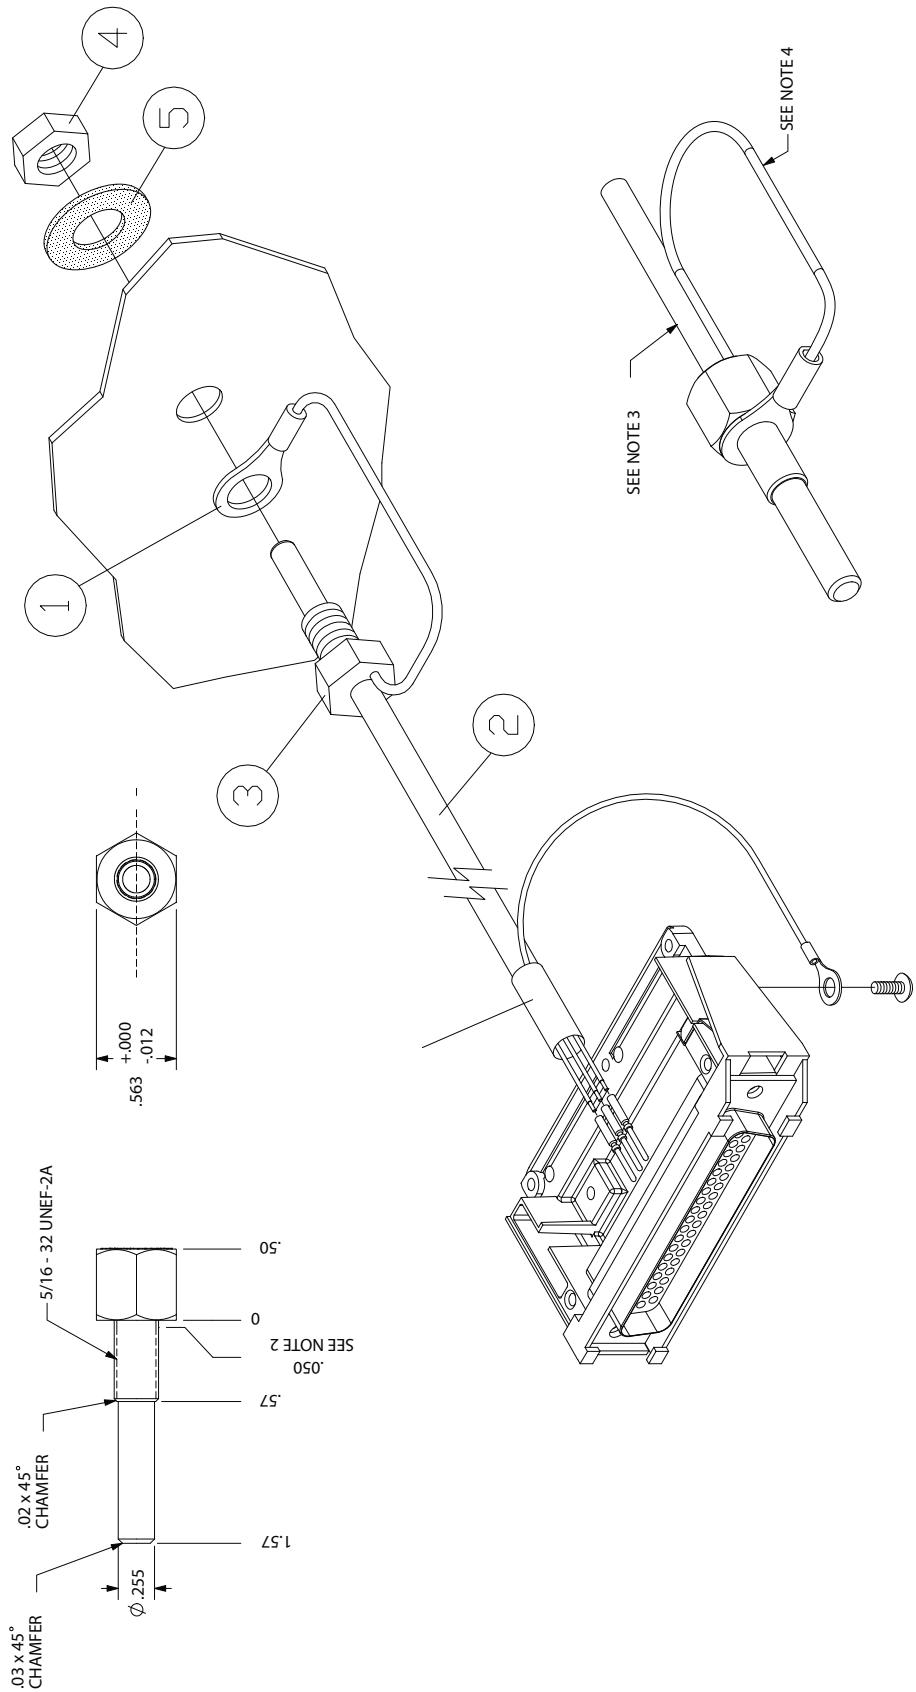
GTP 59 O.A. T. Probe Installation Drawing
